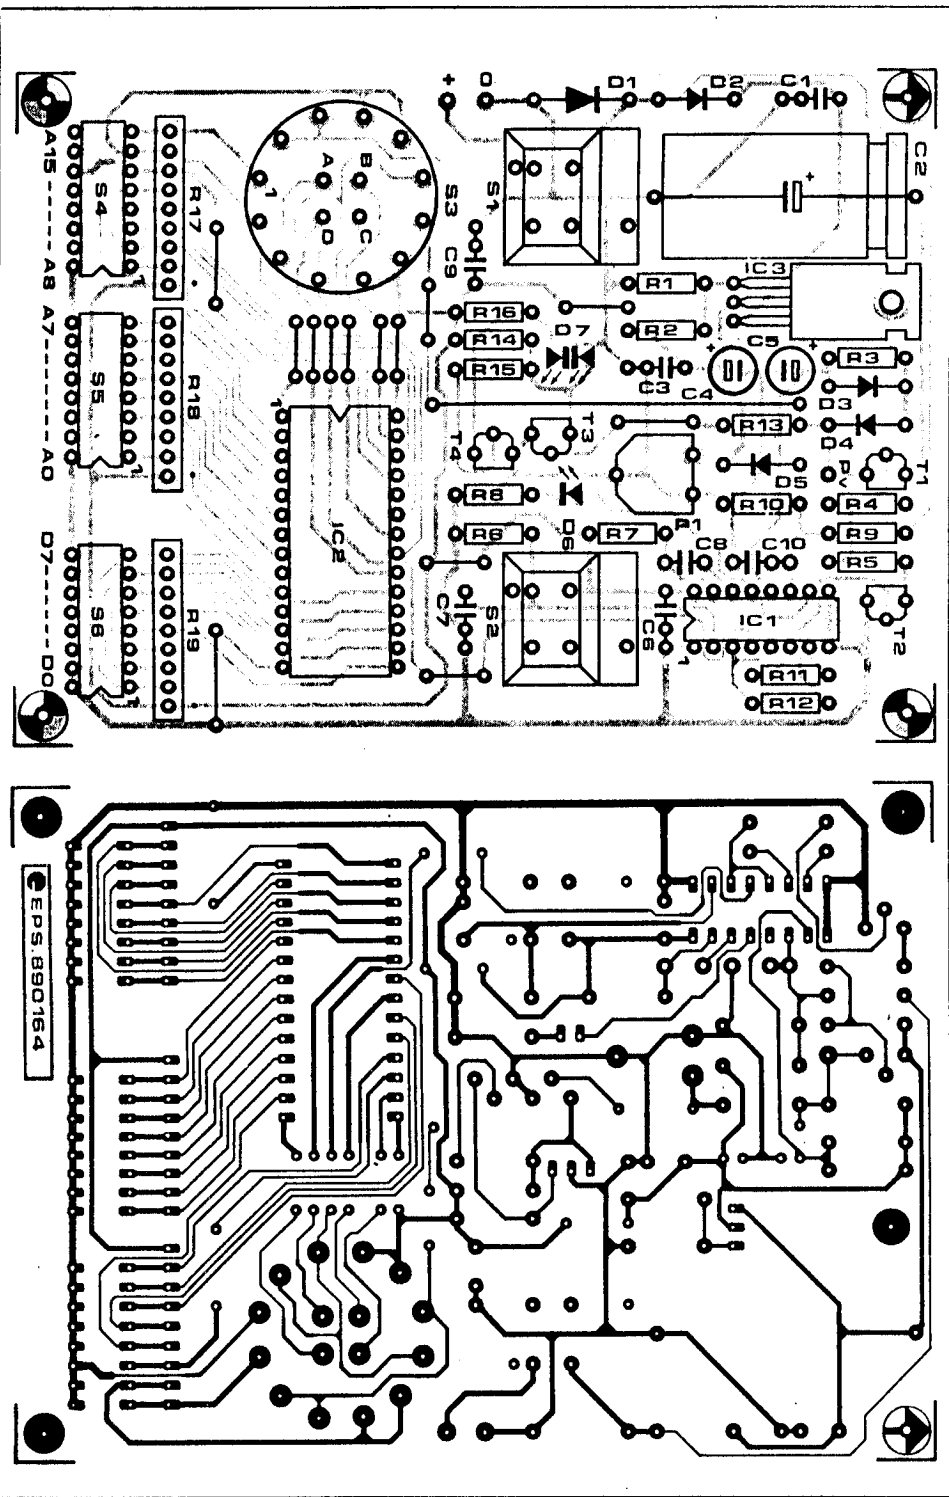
Track layout and component mounting plan of the single-sided PCB for the mini EPROM programmer. Start the construction with fitting the wire links.
